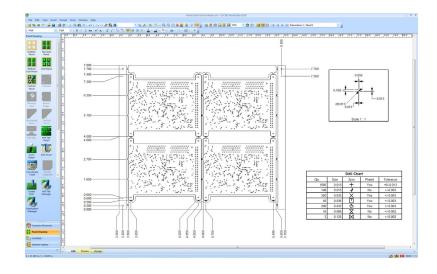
Panel Drawing Detail wizards use the existing PCB and NC milling data to automatically depict mill tab and V-score details
